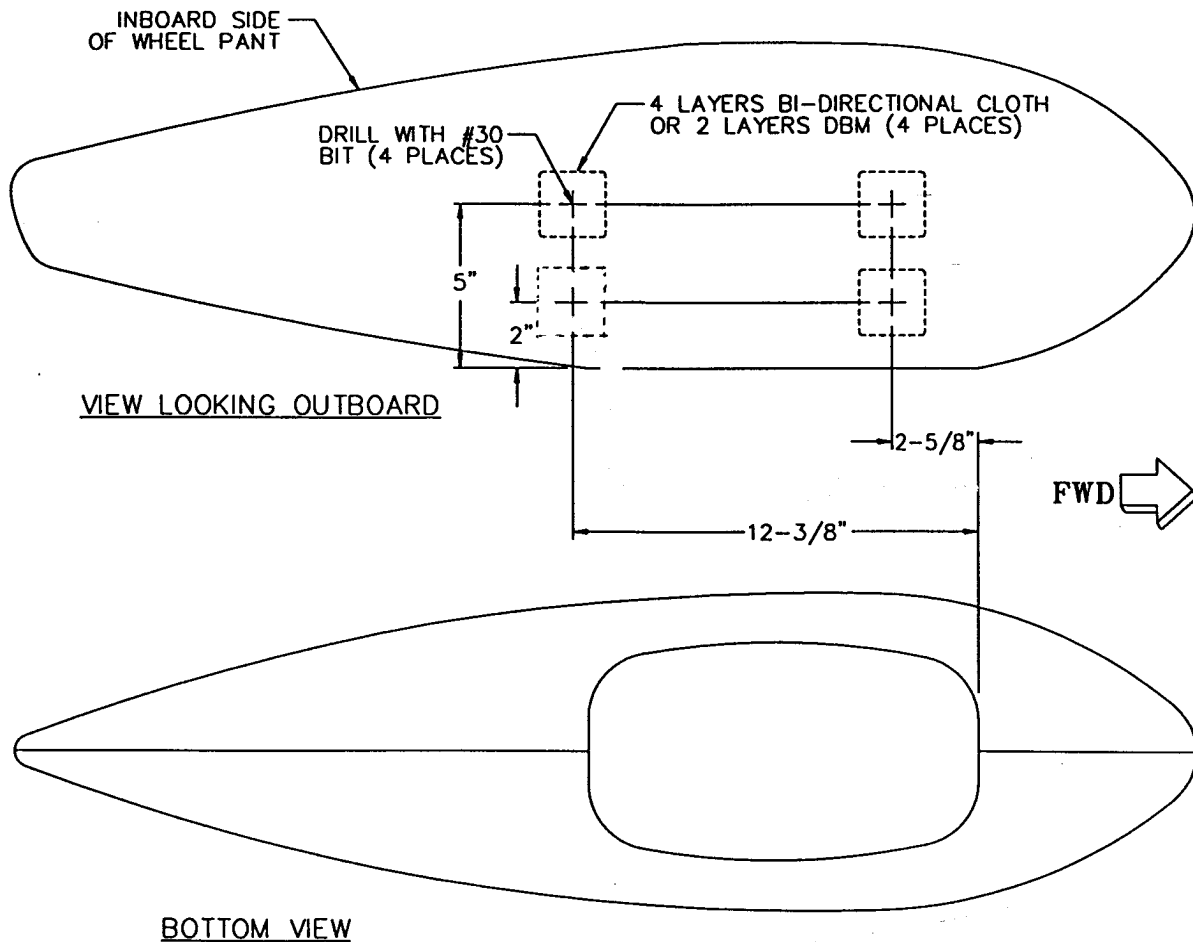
Revised Wheel Pant Lower Aft Foam Spacer Location
